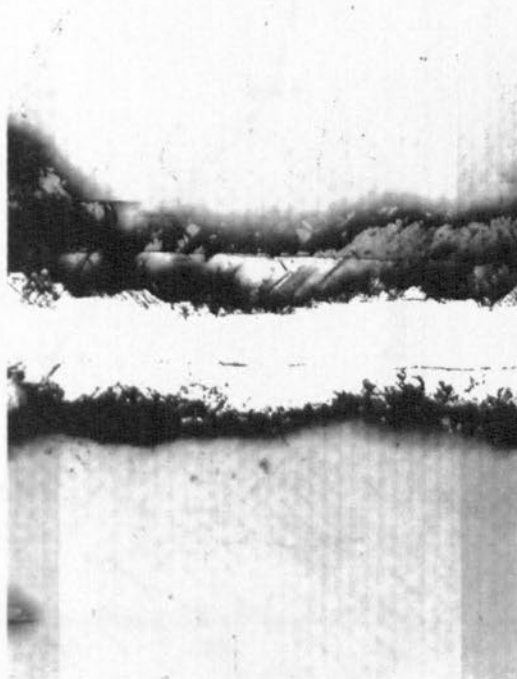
X-Ray of Tensile Fracture for Undamaged Specimen. LE6169/A1/1/16.
